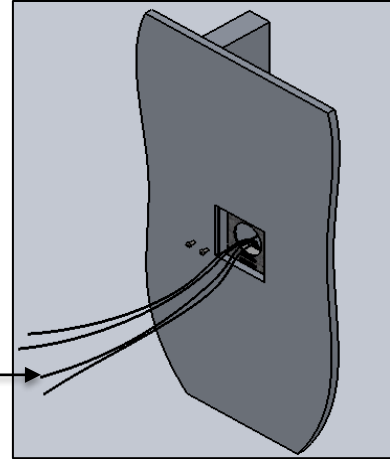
DRIVER PLATE RE-ASSEMBLED
